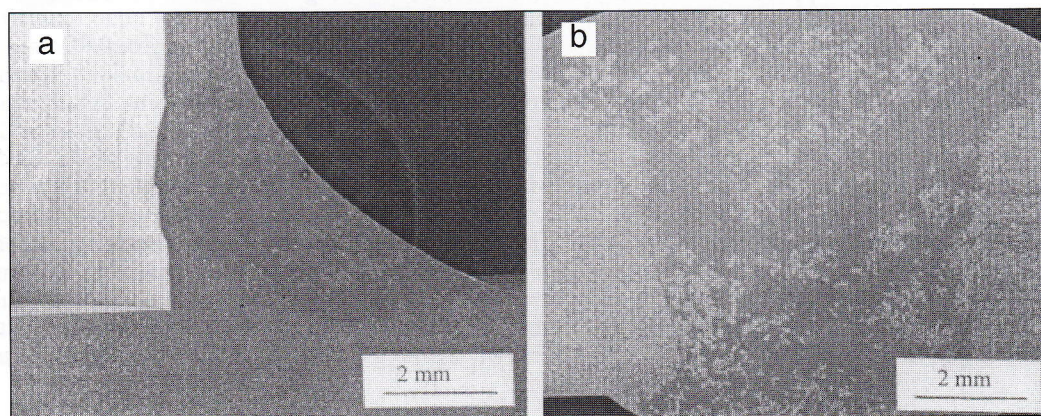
SEM micrographs of a sectioned pipe-to-plate joint welded with Al-5%Si filler metal (a) and of a plate-to-plate joint welded with Al-5%Mg filler metal (b).
